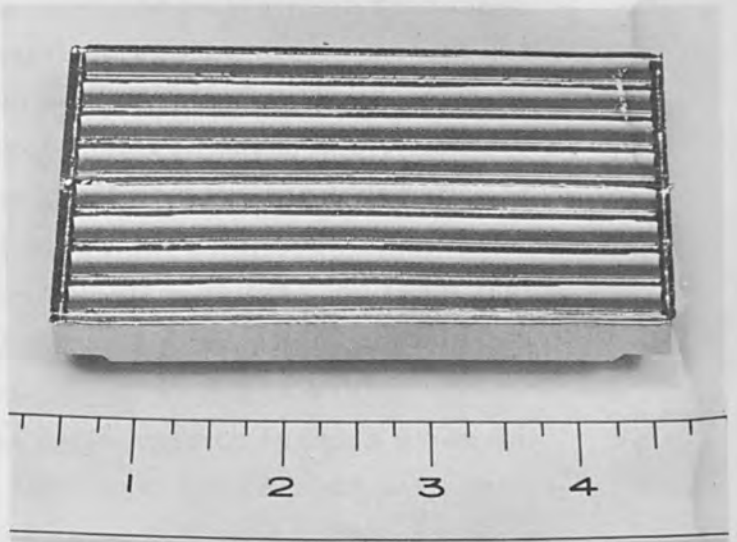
Welded 2 5/8 x 4 in. multistrip ionizer
